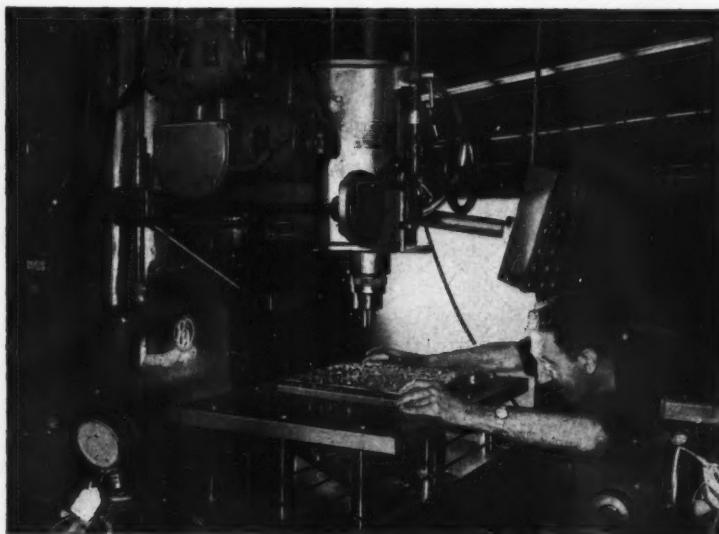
Pratt & Whitney jig borer with auxiliary table, used for boring 36 holes in the gearbox and cover
